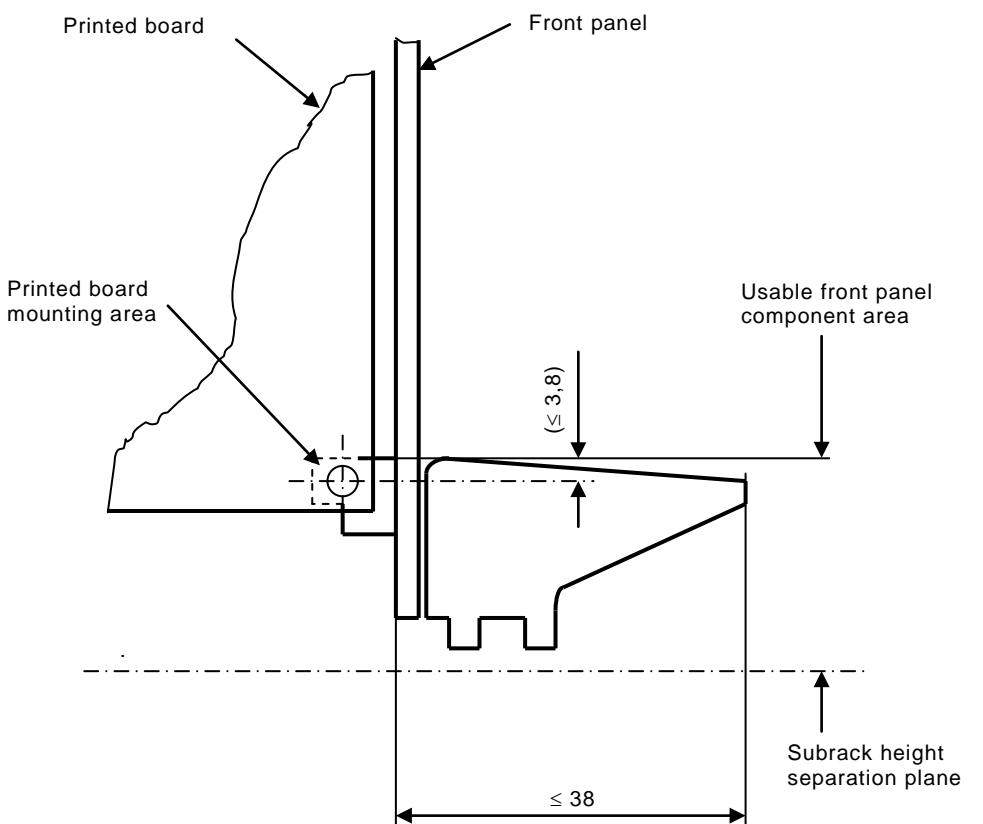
Subrack interface dimensions for front panel mounted injector/extractor, Type A
